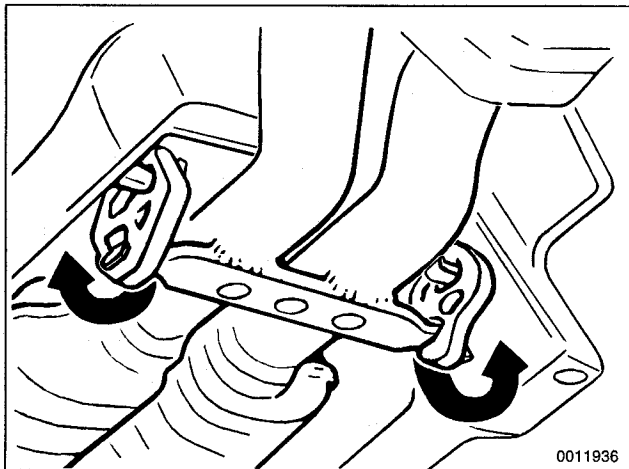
Rubber exhaust system hangers. Remove hanger by prying off bracket (arrows).
